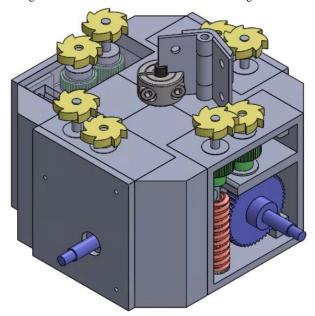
A full assembly CAD model of the 4 DOF prototype SAMM mechanism. The four modules exhibit rotational symmetry with respect to the motor shaft. The cover of one module has been removed for better visibility.
